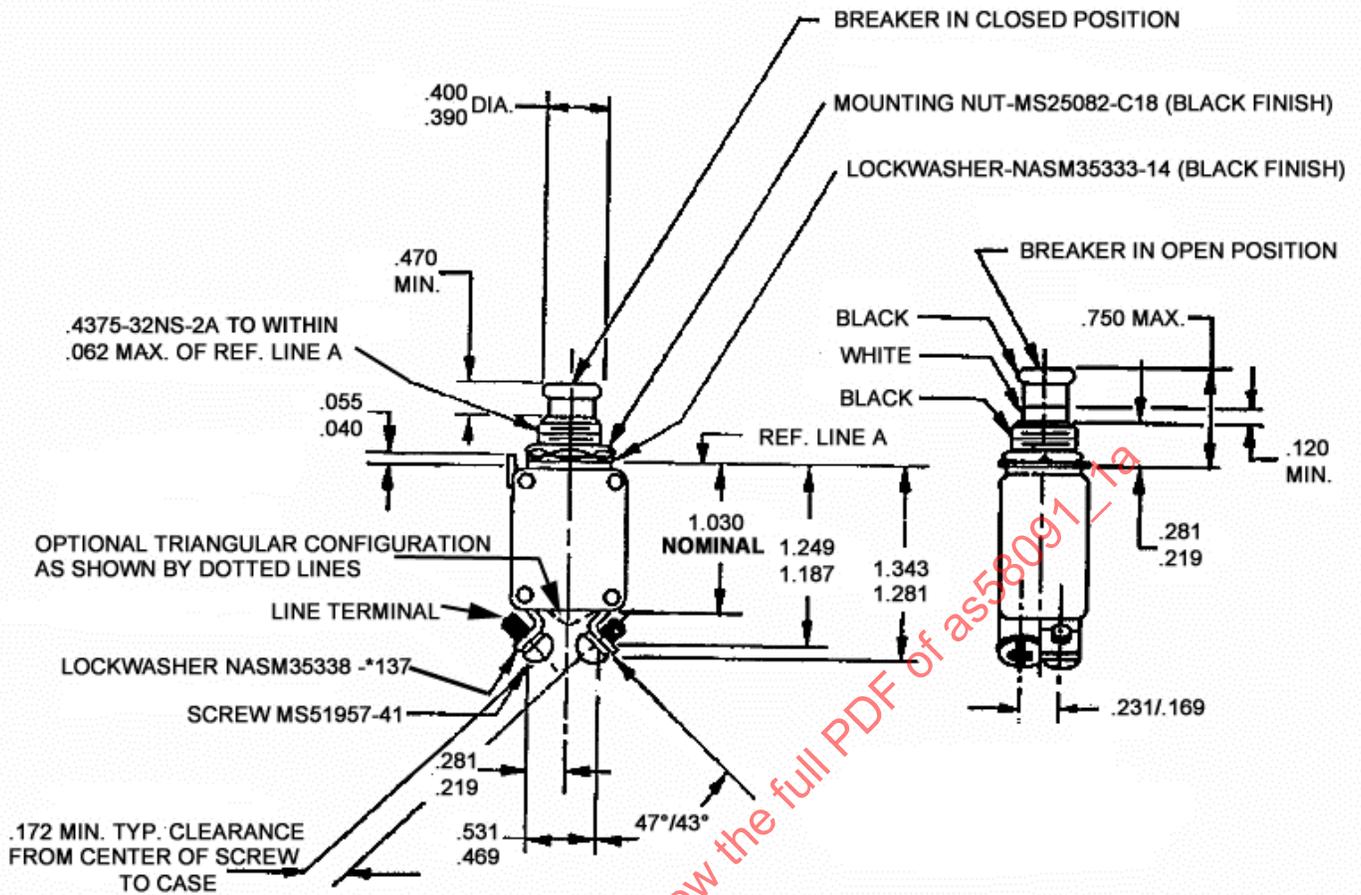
CIRCUIT BREAKER DIMENSIONS
